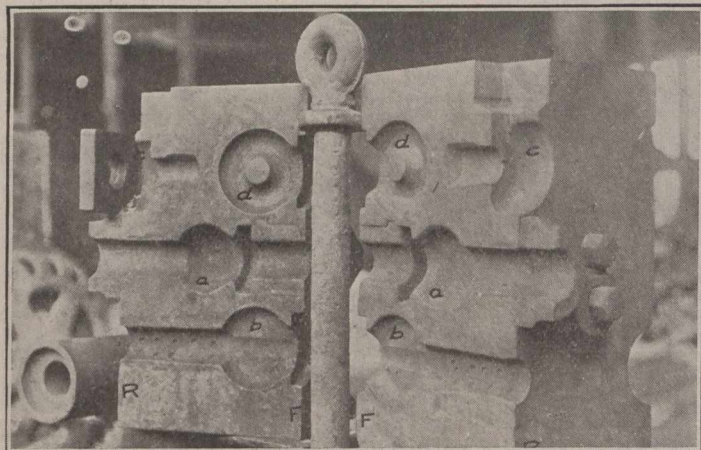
Dies for Forging Eyebolt in Forging Machine.
